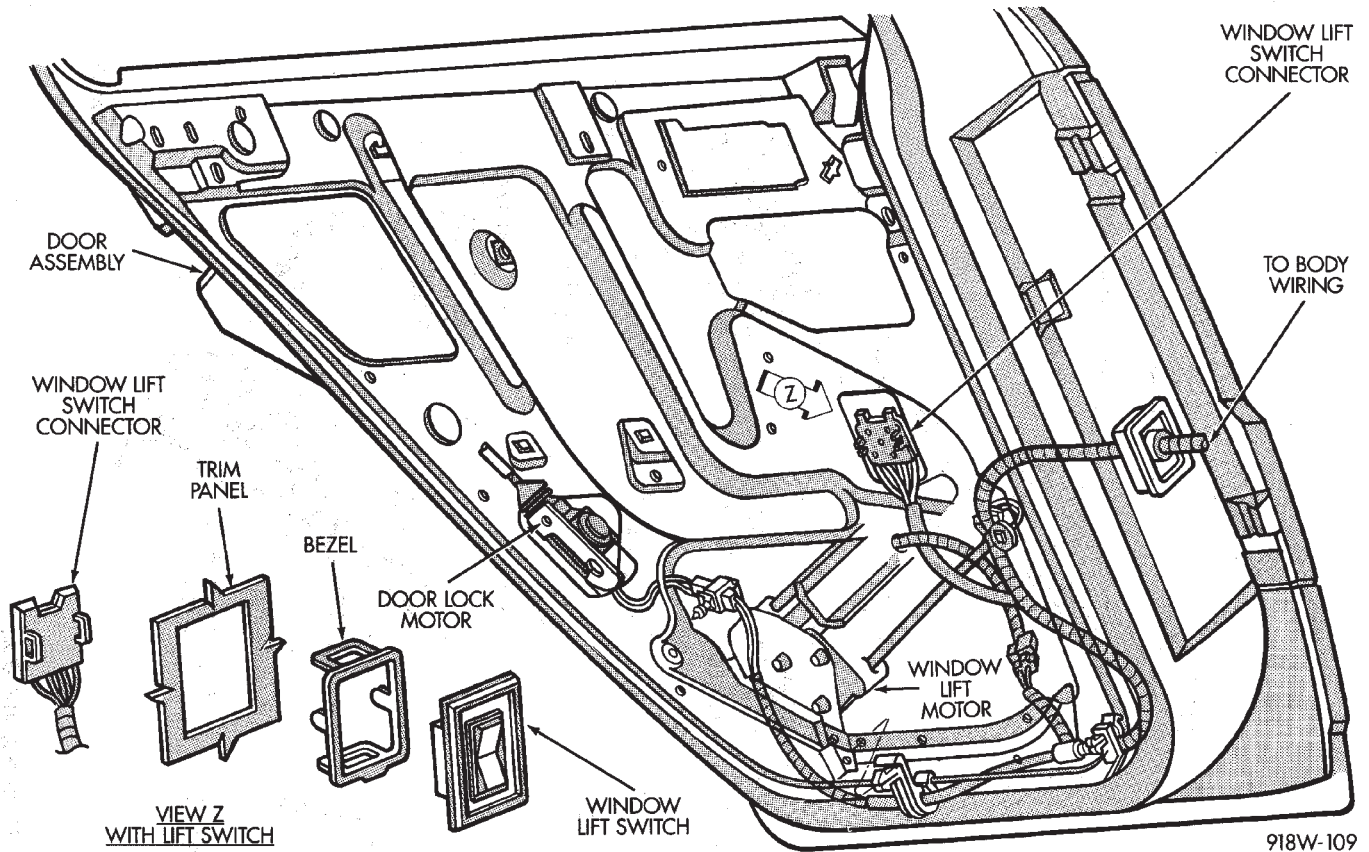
Door Wiring (Rear) 4 dr AP Body
